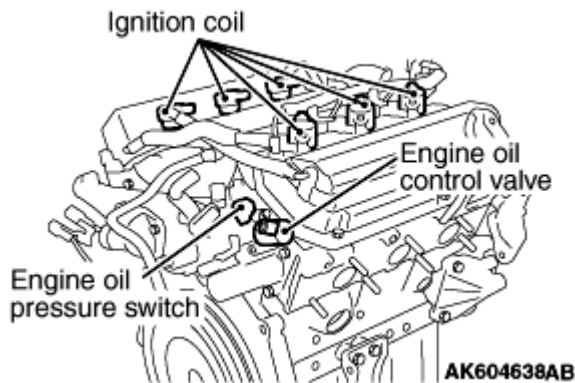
Identifying Ignition Coil, Engine Oil Pressure Switch And Engine Oil Control Valve
